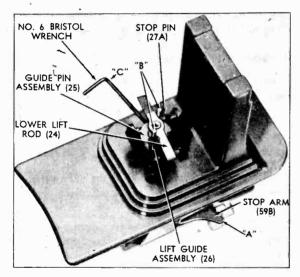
RE-POSITIONING GUIDE PIN ASSEMBLY
